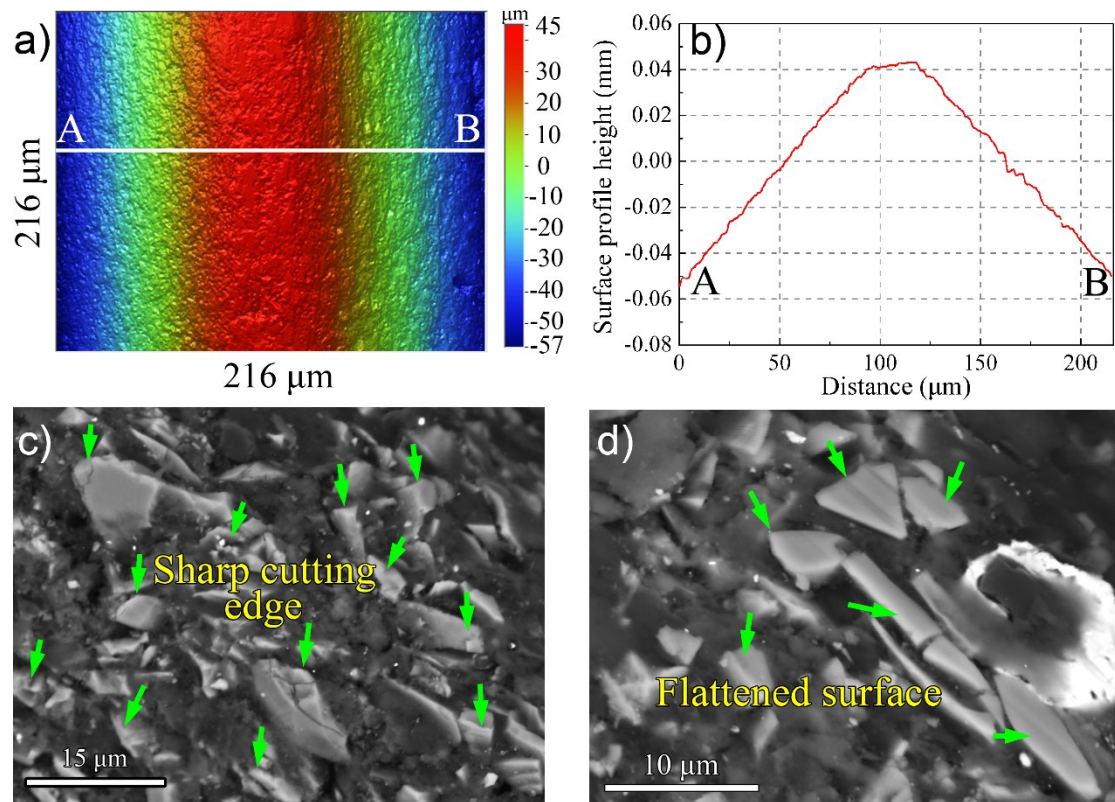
(a) Surface topography and (b) cross-sectional profile of the diamond wheel after grinding; (c) SEM image of the diamond wheel after dressing; (d) SEM image of the diamond wheel after grinding
